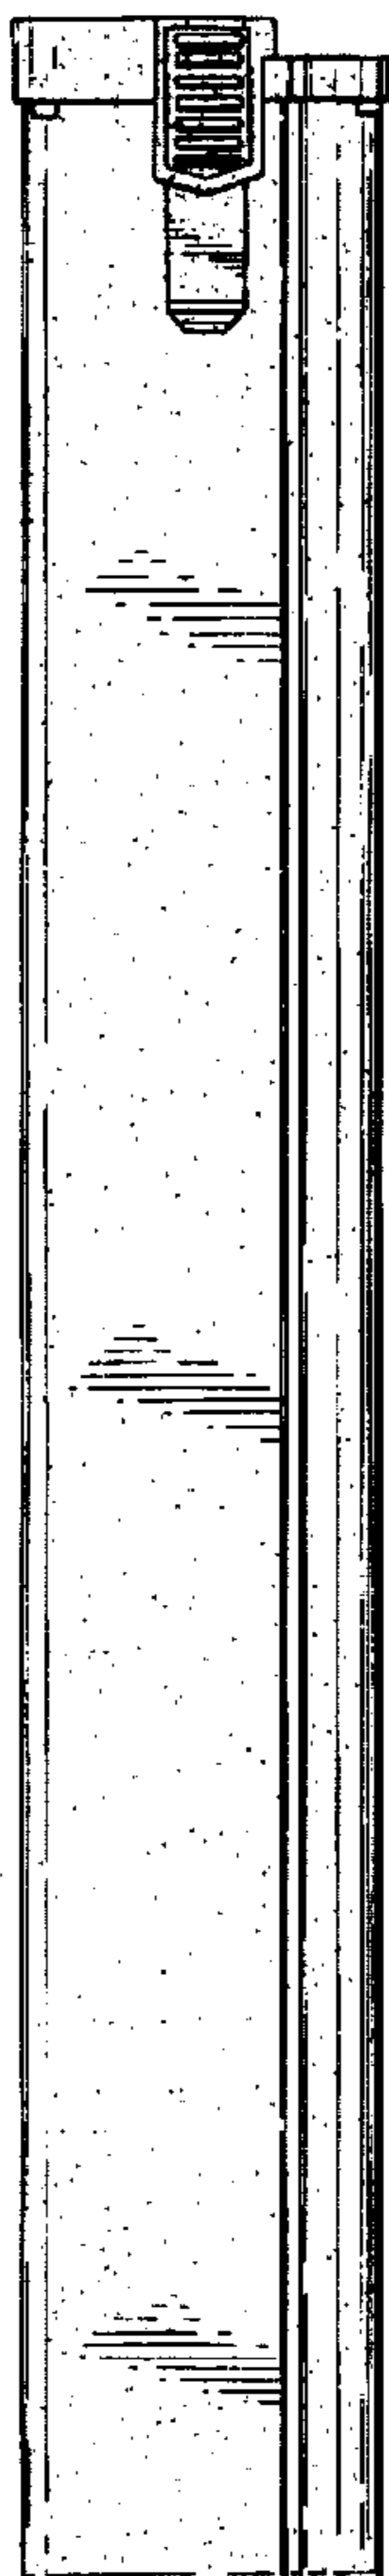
is a front elevational view of a battery pack housing in accordance with the instant design;
